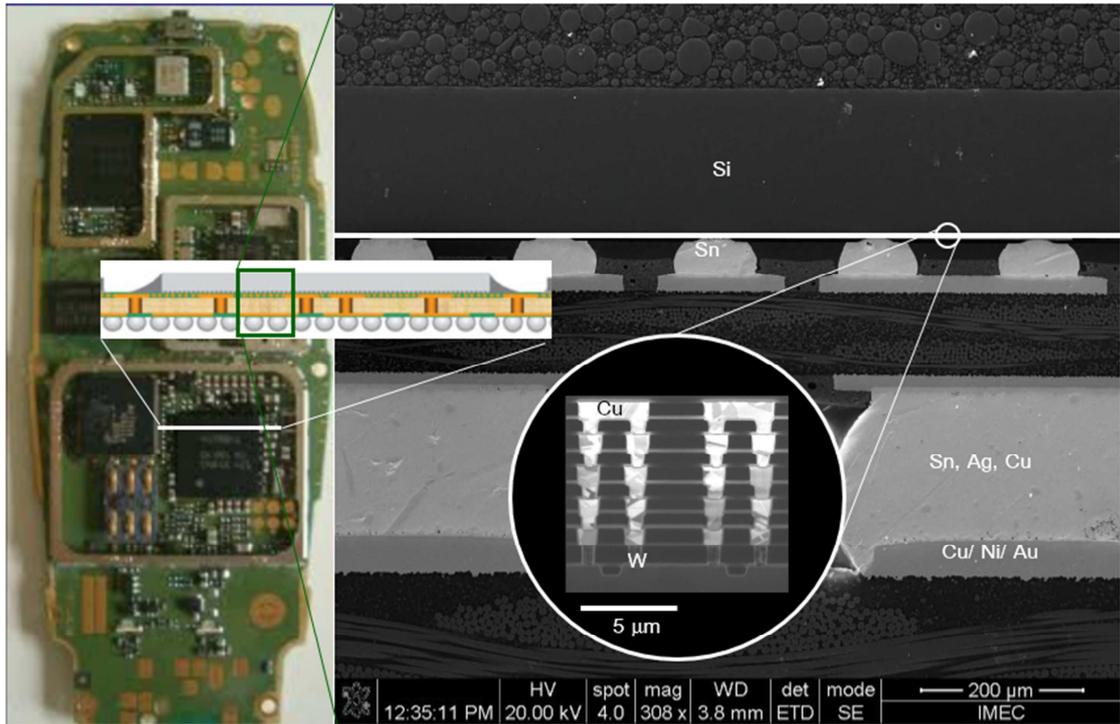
Cross-sectional SEM inspection of flip-chip BGA package showing dimensional differences between PCB, package and on-chip layers. Zoom-in of chip BEOL and FEOL layers is shown in circular insert.
